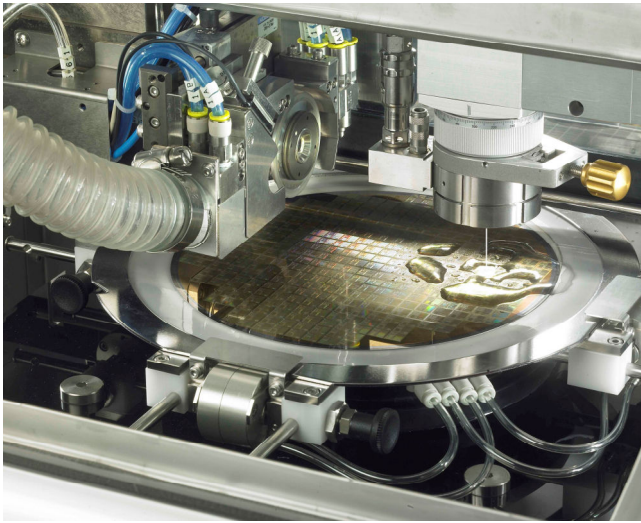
View showing Disco blade saw and the Synova LMJ optical head integration
